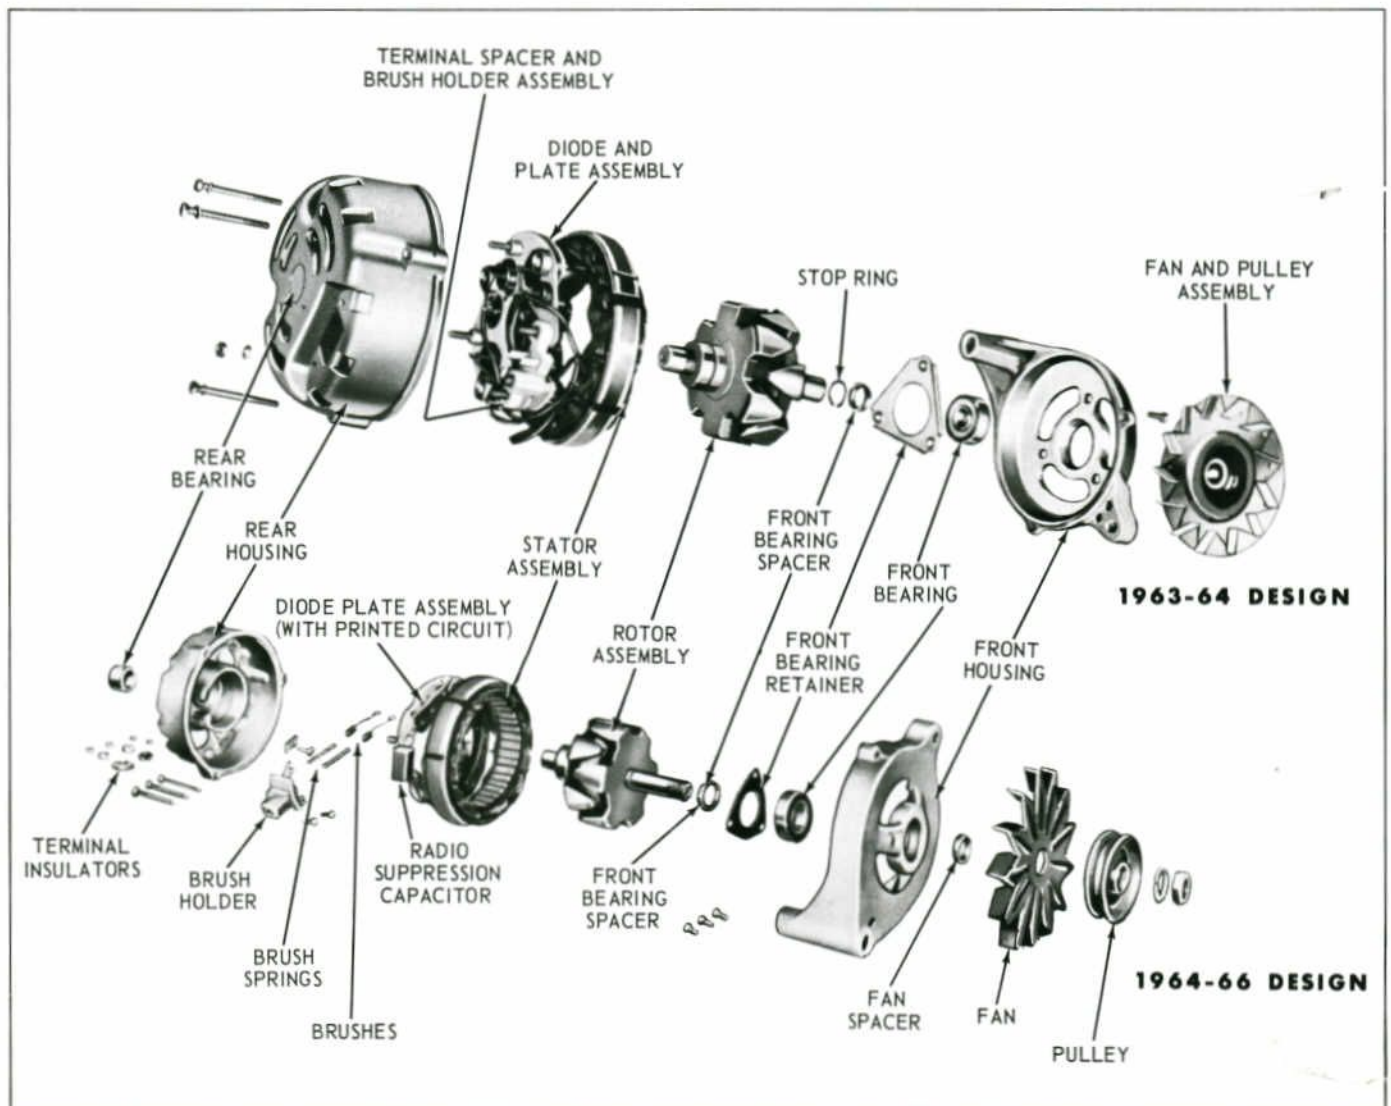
TYPICAL ALTERNATOR ASSEMBLY DESIGNS — EXPLODED VIEWS
